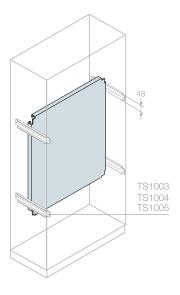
,5mm galvanized steel which can be inserted at the front and/ or at the back. Complete with supports for sliding and fixing.
